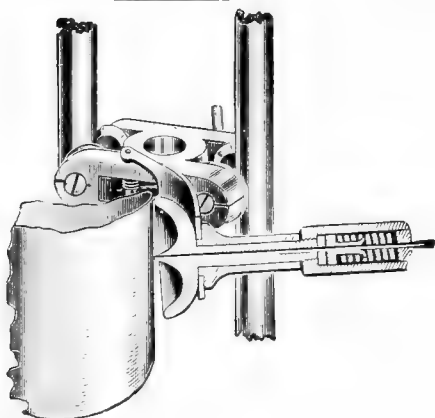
Pencil Holder for Boyer Speed Recorder. Chicago Pneumatic Tool Company.
